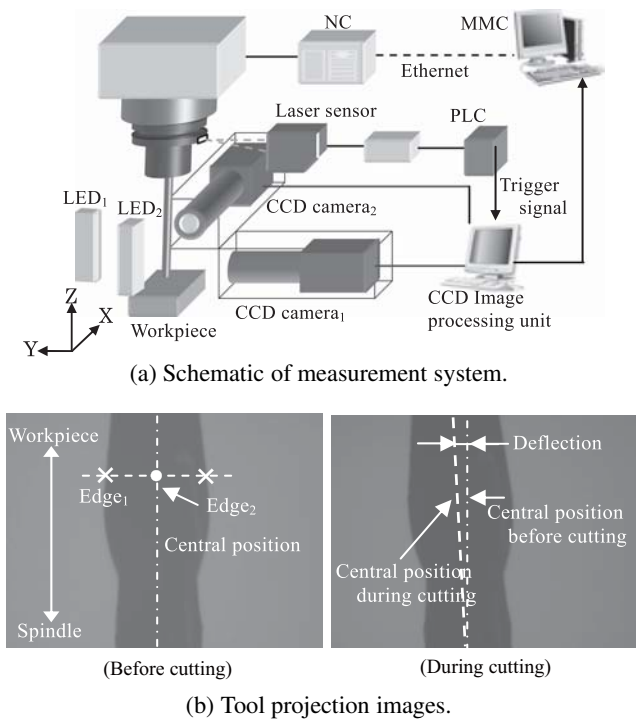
Two-dimensional monitoring system for tool behavior in end milling using small-diameter tool [46].
